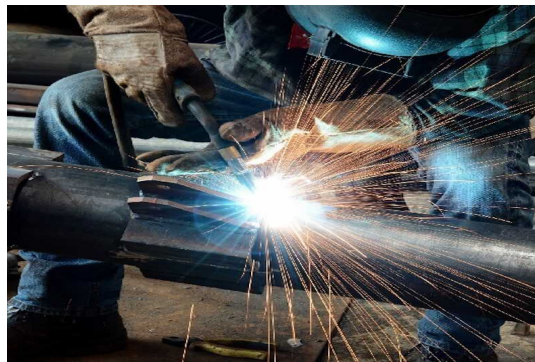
Represting the overview about Pipe welding [Australian General Engineering Vietnam].
